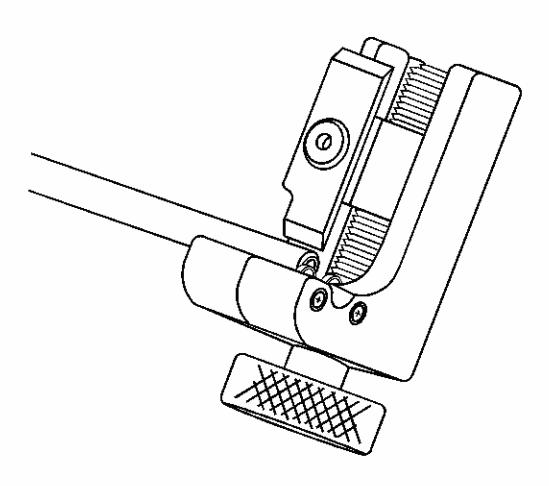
Stripping Nylon Coating From Brake Pipe Ends Courtesy of GENERAL MOTORS CORP.
